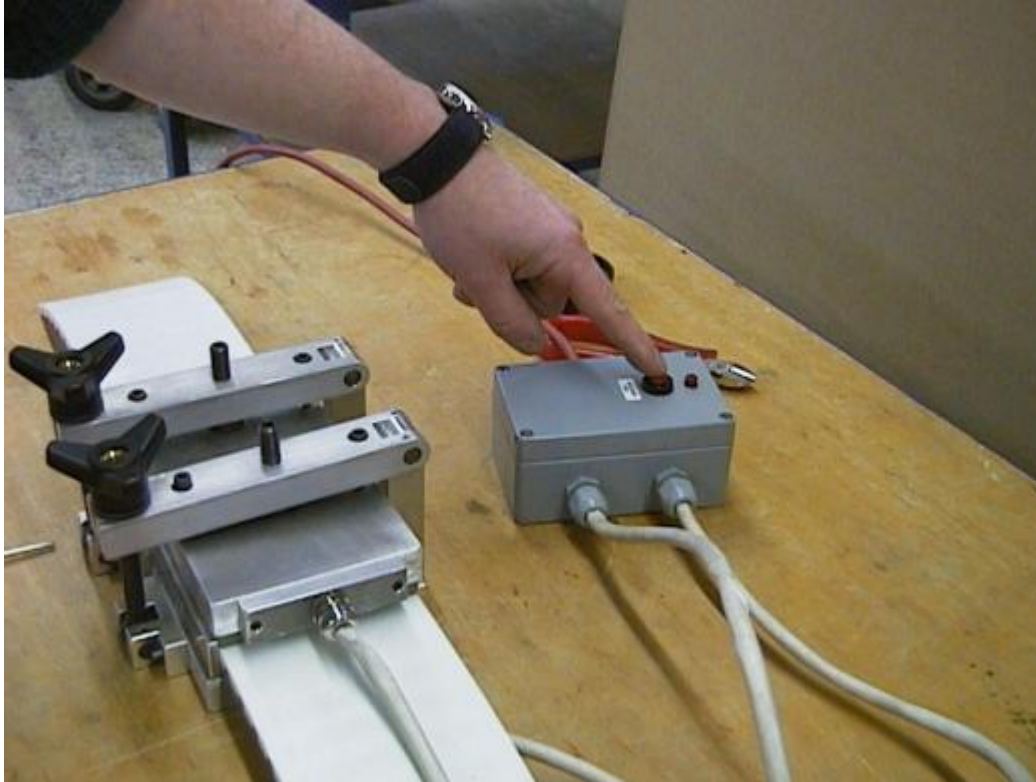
Make sure that the power cord is plugged in. Switch on the heating element. The indicator will light for only the first few minutes of the cycle.
